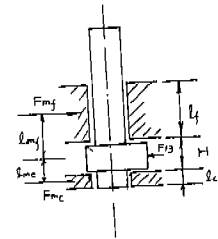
Force Acting on The Main Bearing And The Sub-bearing
